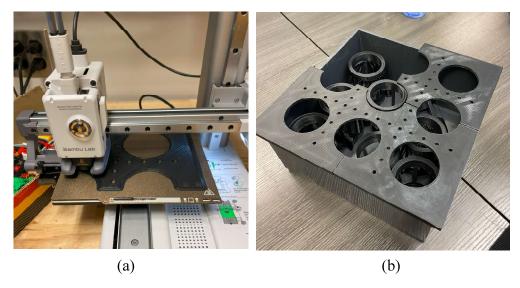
(a) one of four lid pieces being 3D printed. (b) three out of four lid pieces assembled.
